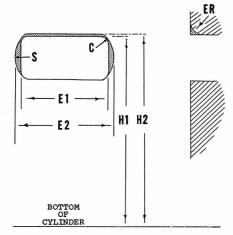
Raising the exhaust port in cylinder will cause port to open sooner. If port modifications are incorrect, rings will probably catch and cause extensive damage. Radius (S) at sides and rounded edge (ER) guide rings back into grooves.
